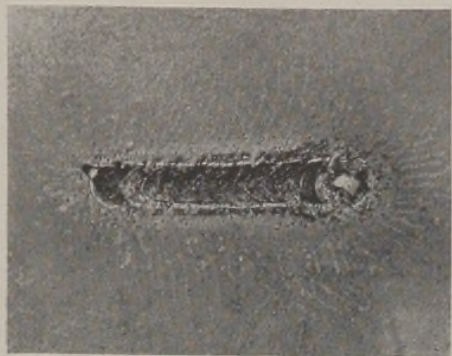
Lines radiating from the weld are located where the mill scale has cracked off of the plate because the residual stresses produced by the weld shrinkage has exceeded the yield point of the material.
